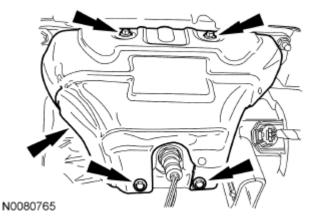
Locating Exhaust Manifold Heat Shield Bolts And Heat Shield Courtesy of FORD MOTOR CO.
